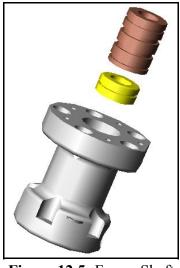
Femur Shaft Bearing Housing/Linear Bearings exploded assembly
